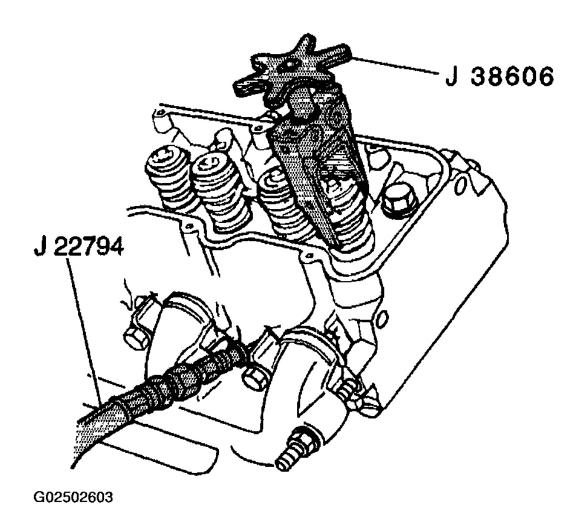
Installing Valve Spring Compressor (J 38606) Courtesy of GENERAL MOTORS CORP.
